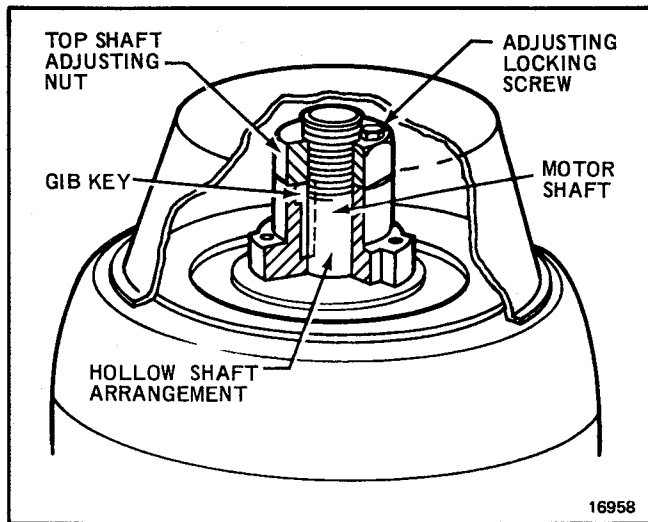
IMPELLER ADJUSTMENT - HOLLOW SHAFT
